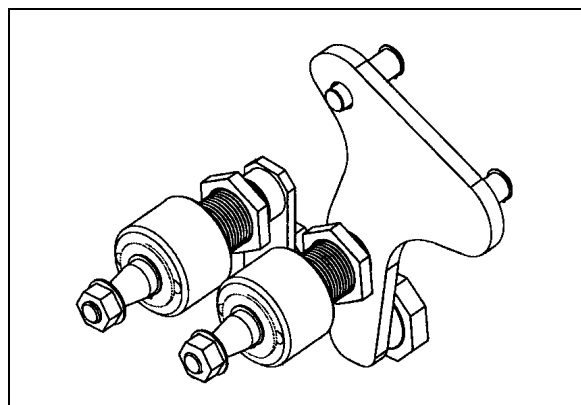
DRIVING MECHANISM (MOTOR SIDE) 23285
